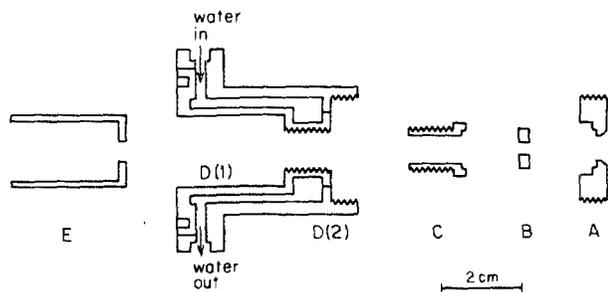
Expanded view of anode assembly: A, threaded copper front holder; B, thoriated tungsten nozzle anode; C, threaded copper back holder; D (1) and (2), brass anode housing; E, macor cylinder.
